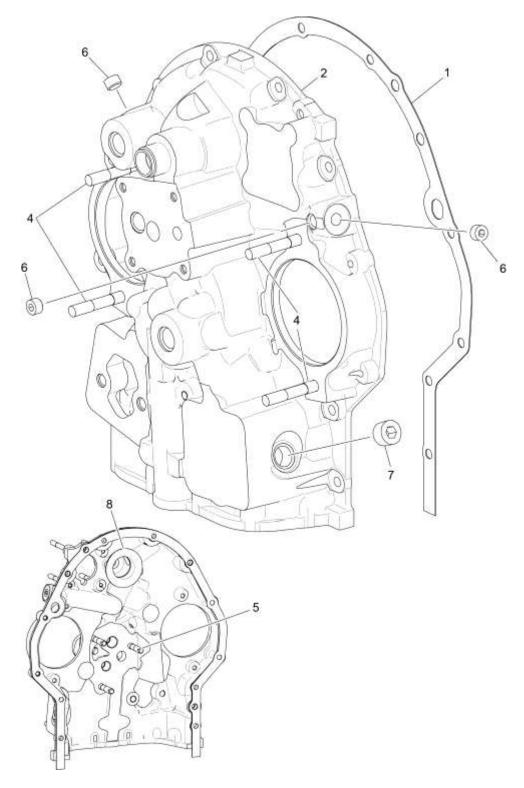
B Accessory Housing Assembly (D1B6 and D3B6)
